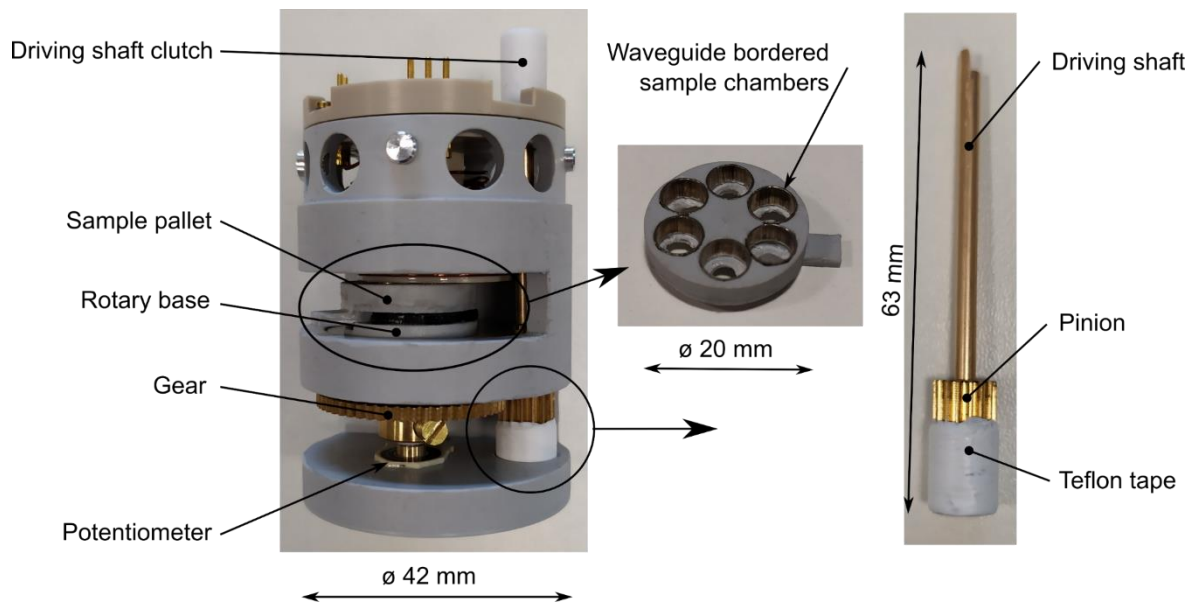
Carousel sample holder prototype – assembled – workshop CEITEC BUT.
